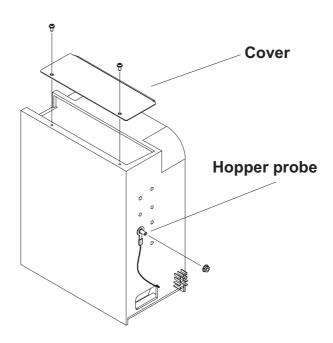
Adjusting the Hopper Probe on the ES500 Machine
